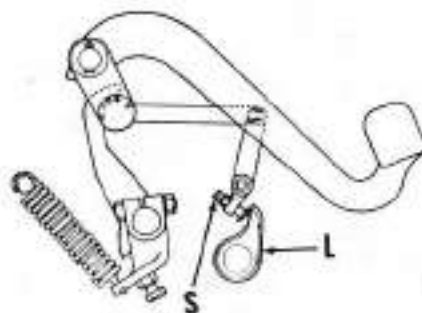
View showing adjusting screw (S) for clutch stop lever (L) clearance; refer to paragraph 132.
